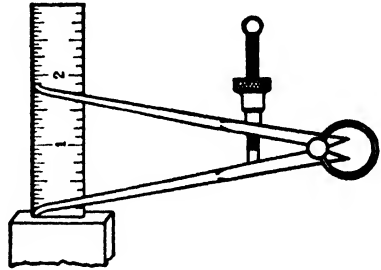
Setting or reading an inside caliper. (South Bend Lathe Works)
